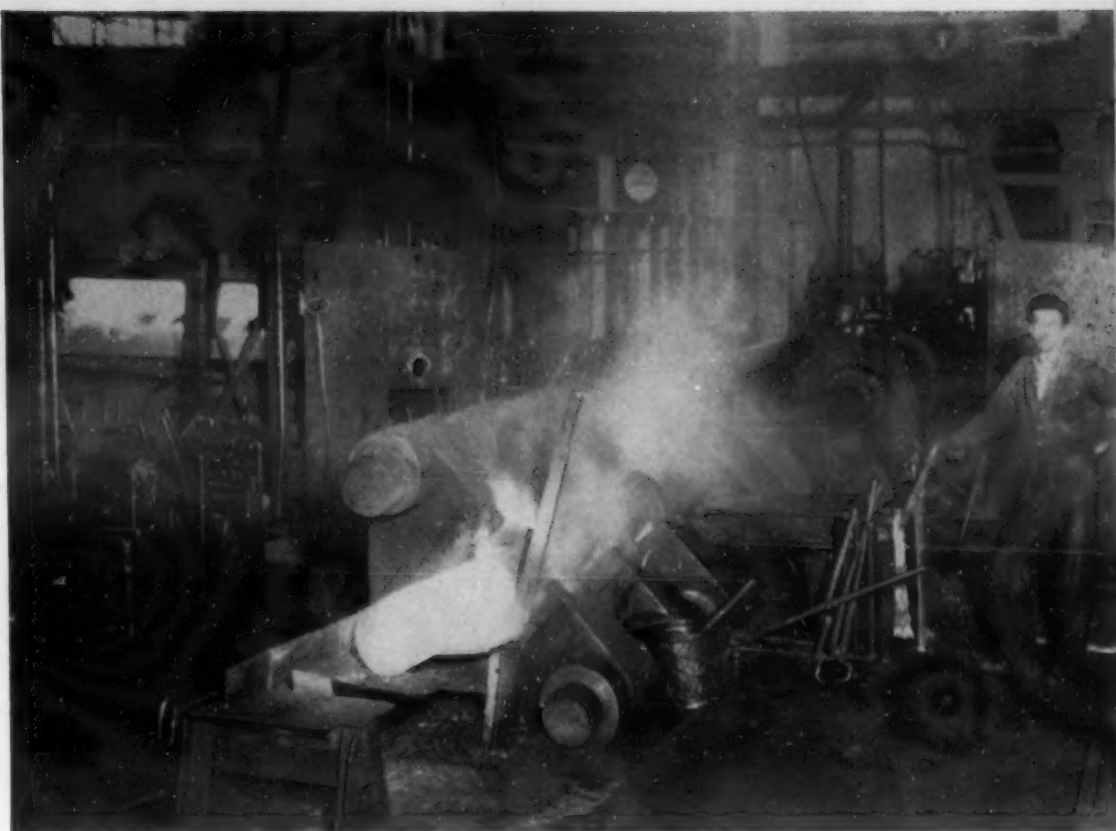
Horizontal hydraulic ring type of shell drawing press.
